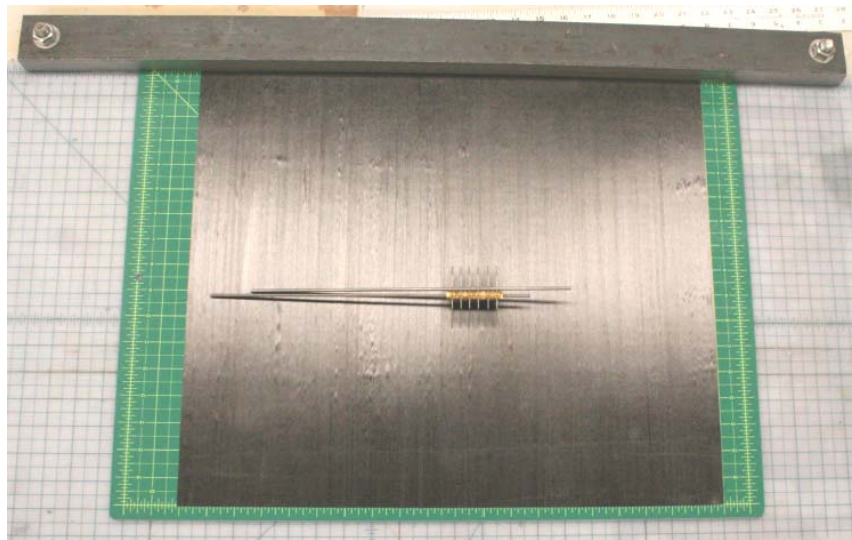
Cutting tool and clamping fixture used to perform the longitudinal slitting of prepreg.
